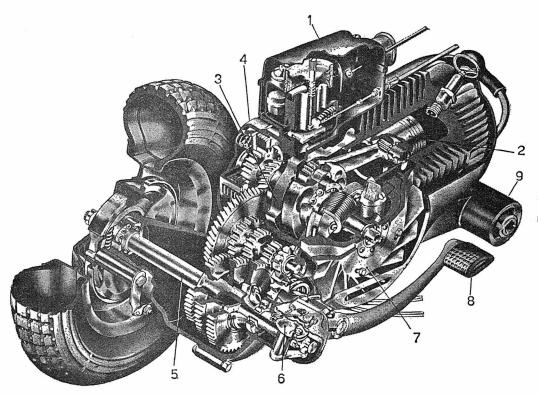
Sectional view power plant which has a rotary inlet valve integral with the crankshaft.
